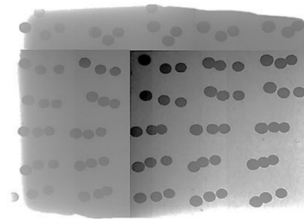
Radiographic image of the stamping with well-visible deformed lead balls
